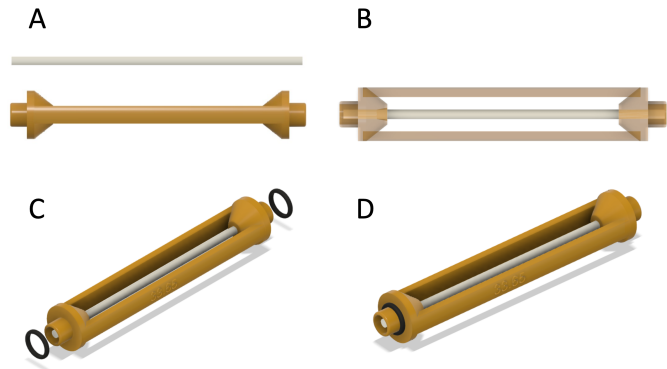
A HFM (top) and HFM chip insert (bottom) before gluing. B Insert with HFM glued inside of it. C Two two-and-a-half mm diameter O-rings should be stretched over the HFM chip inserts on both sides. D HFM insert with two O-rings in the right configuration.
